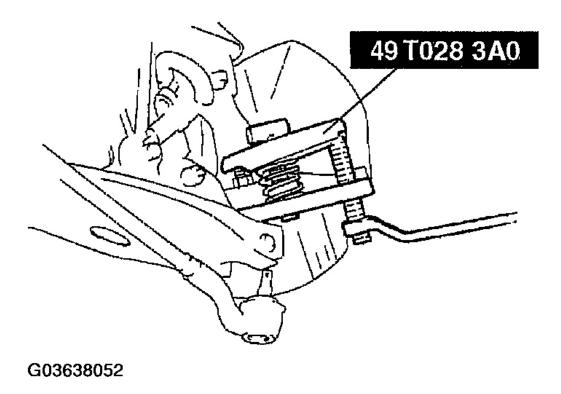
Separate Ball Joint From Knuckle Using SST Courtesy of MAZDA MOTORS CORP.
